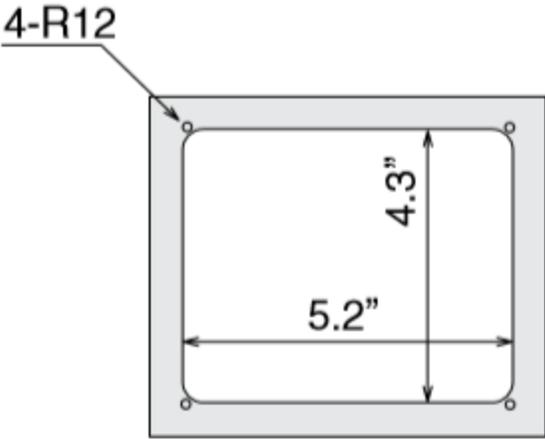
RD-33 FLUSHMOUNT BASE PLATE VIEW
